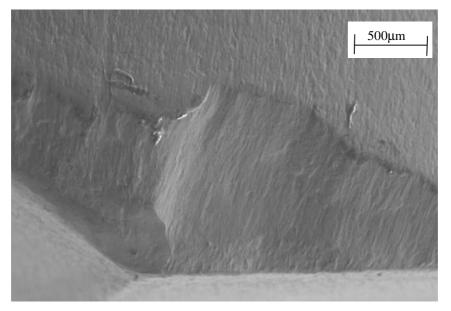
Cutting Edge Fracture in tool P4
